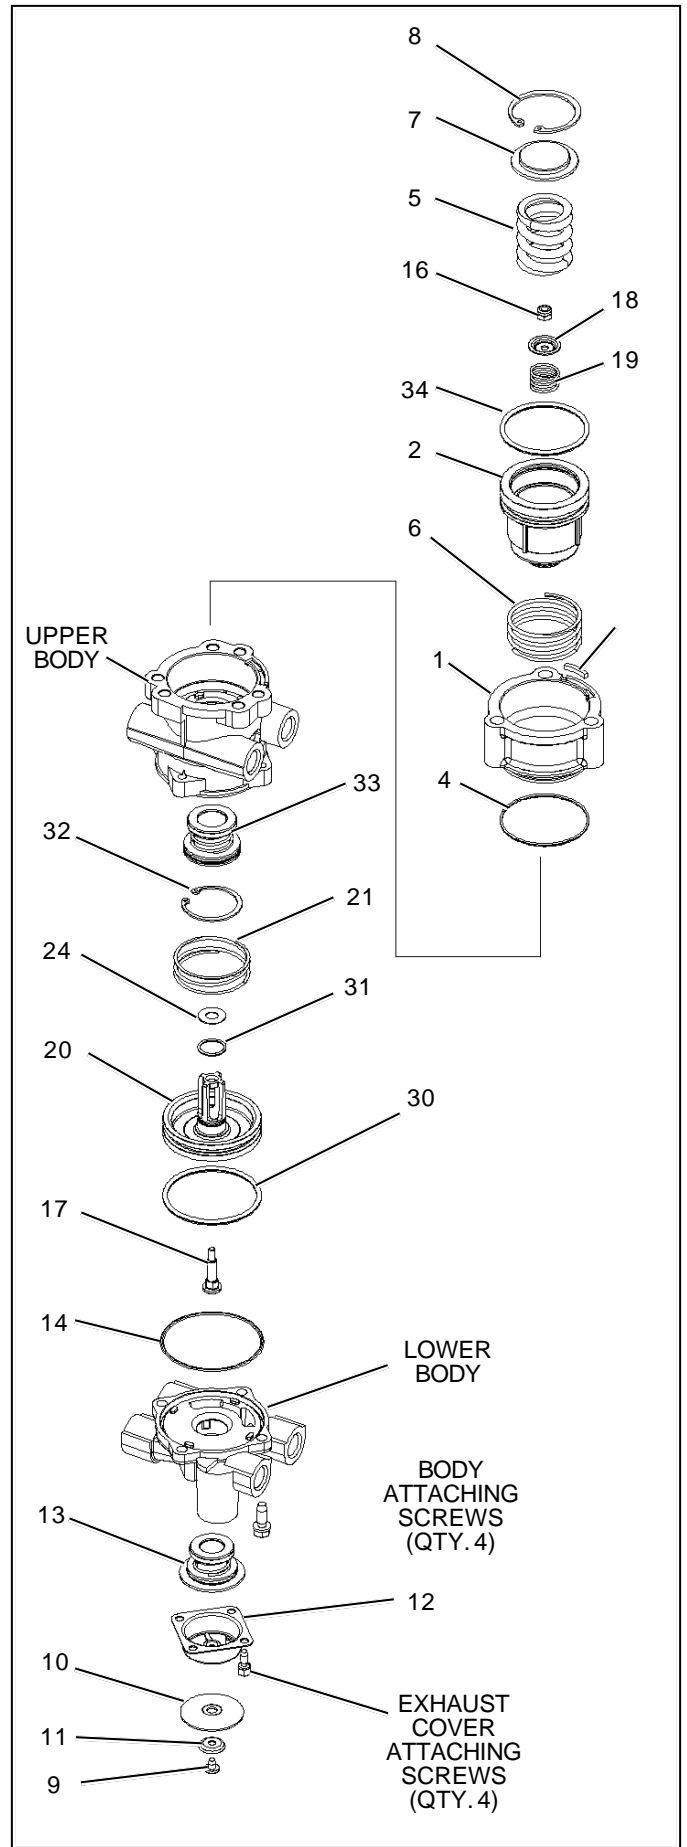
E-10P BRAKE VALVE - EXPLODED VIEW
